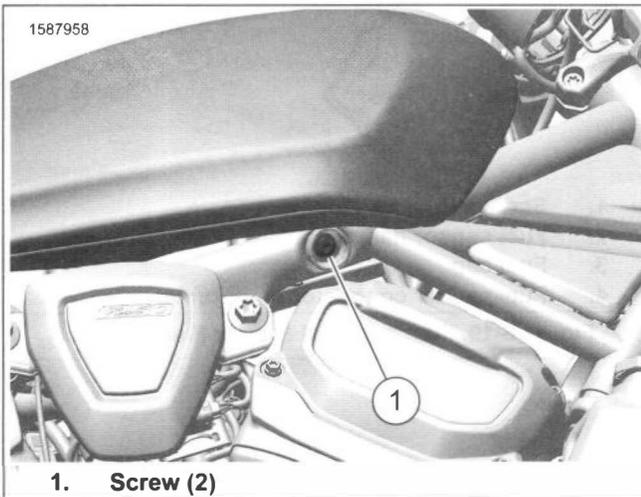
Fuel Tank Mount Screws (Right side shown, left side same)
